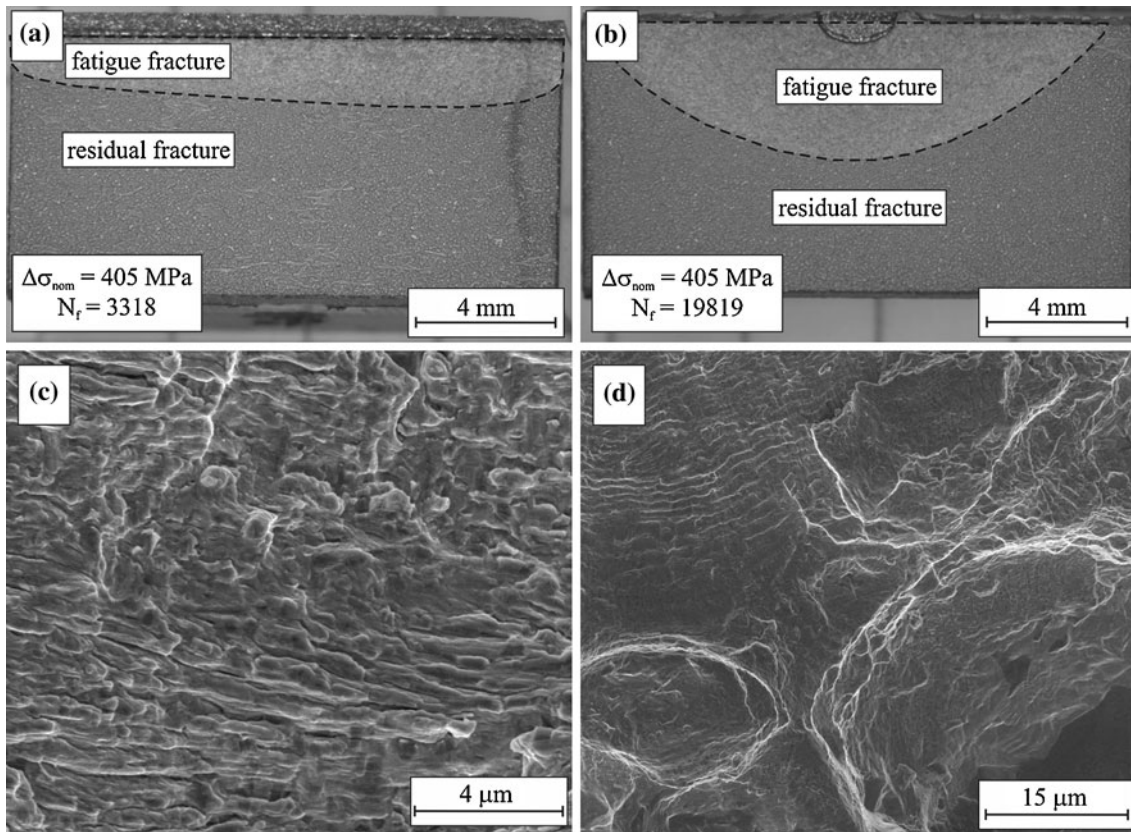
Fractographic investigations of a T-joint specimen, containing (a) a straight and (b) a semi-elliptical defect, (c) of the fatigue fracture surface, and (d) at the transition between fatigue and residual fracture surface
